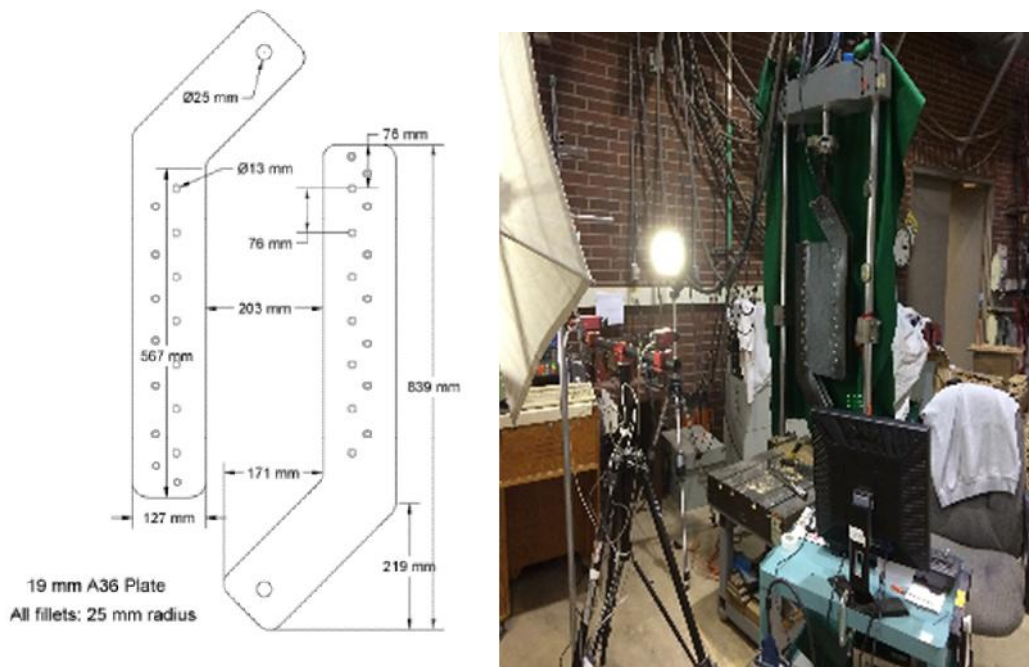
Brackets used for clamping specimen during in-plane shear test (Alldritt, 2013)
